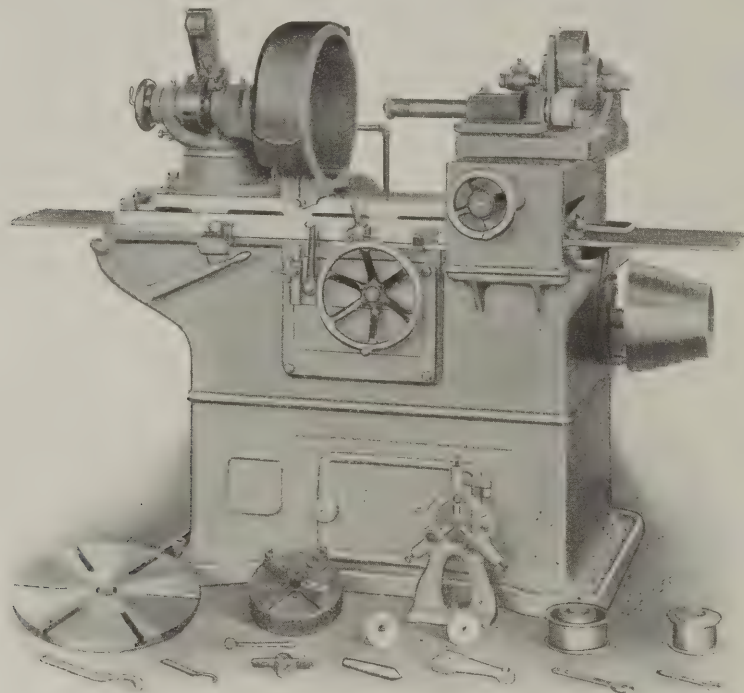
Brown & Sharpe No. 22 Internal Grinding Machine
